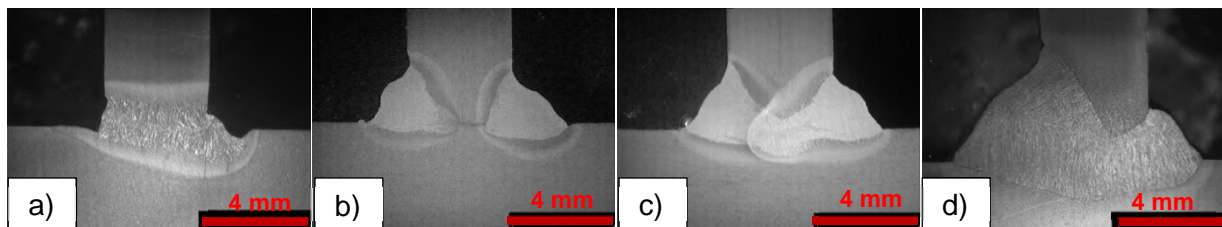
Fillet joints; a) fully penetrated laser weld; b) double sided shallow penetration hybrid weld; c) double sided deep penetration hybrid weld; d) fully penetrated hybrid weld
